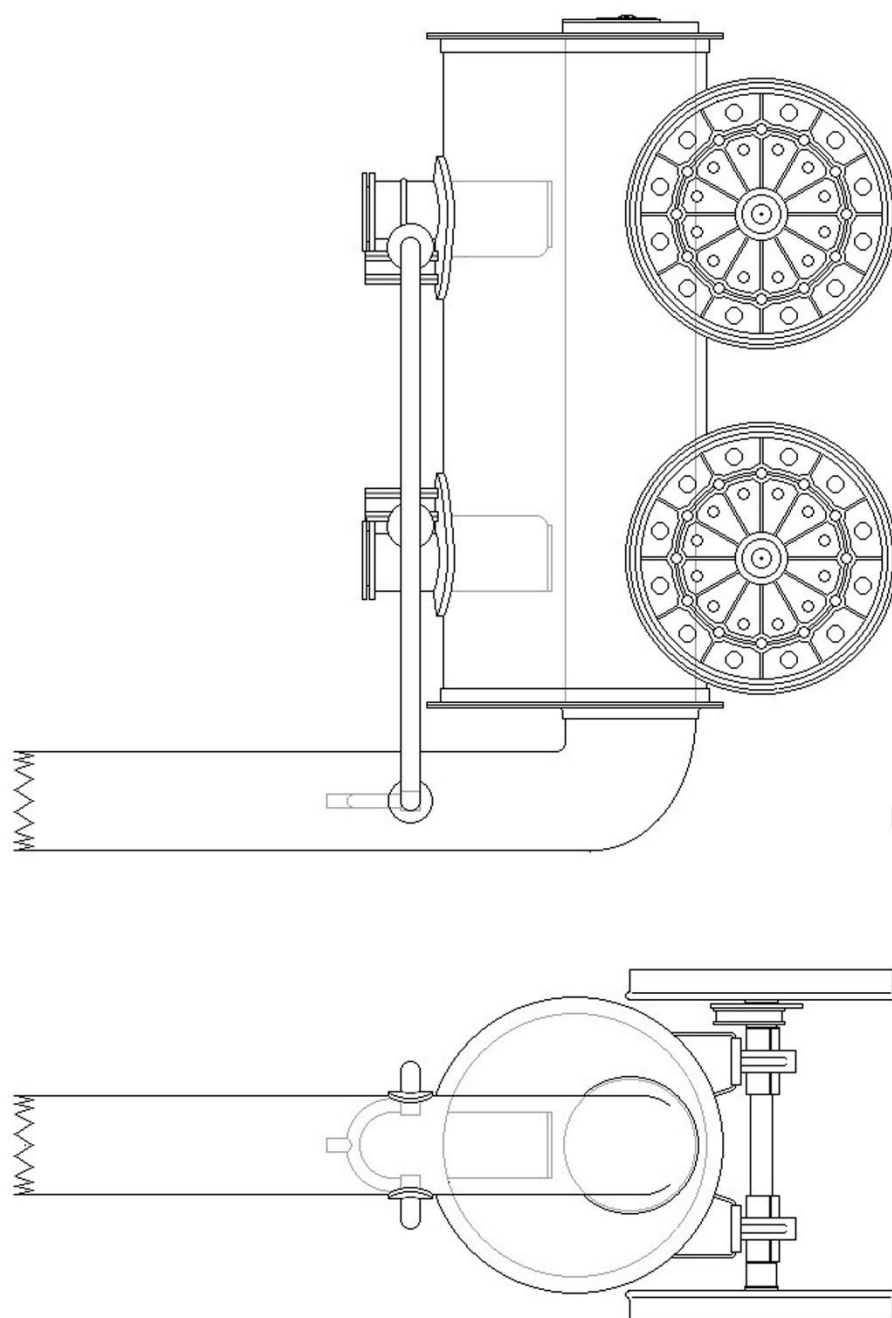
No.1 as re-formed in 1856/7 to resemble its 1825 appearance – Showing replicated single flue and chimney arrangement. (Parallel motion, connecting and coupling rods omitted)
